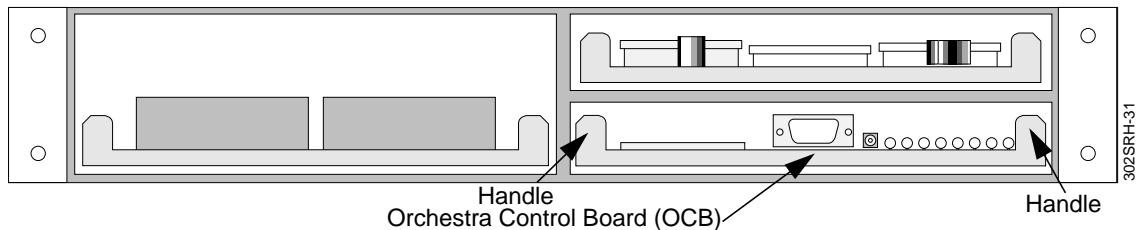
Front View of the OCB location in the OCM (Cover Removed)
